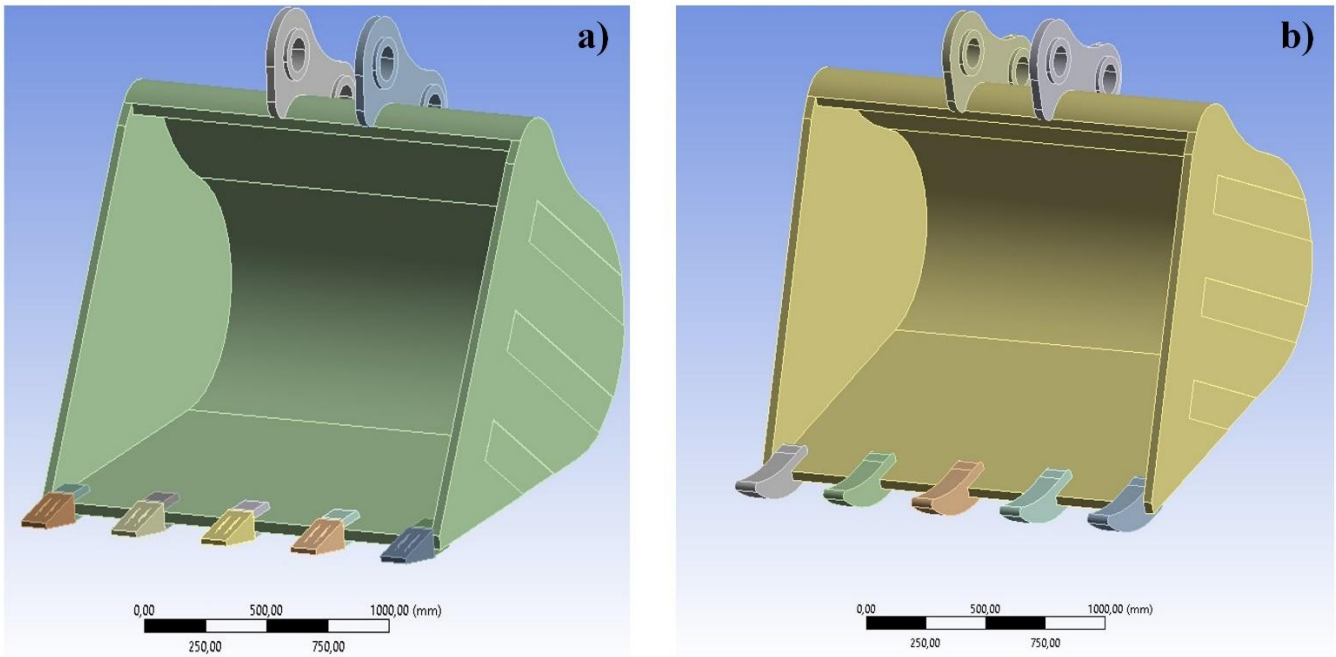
a) Standard Excavator Bucket General View b) General View of Armadillo Claw Design Excavator Bucket
